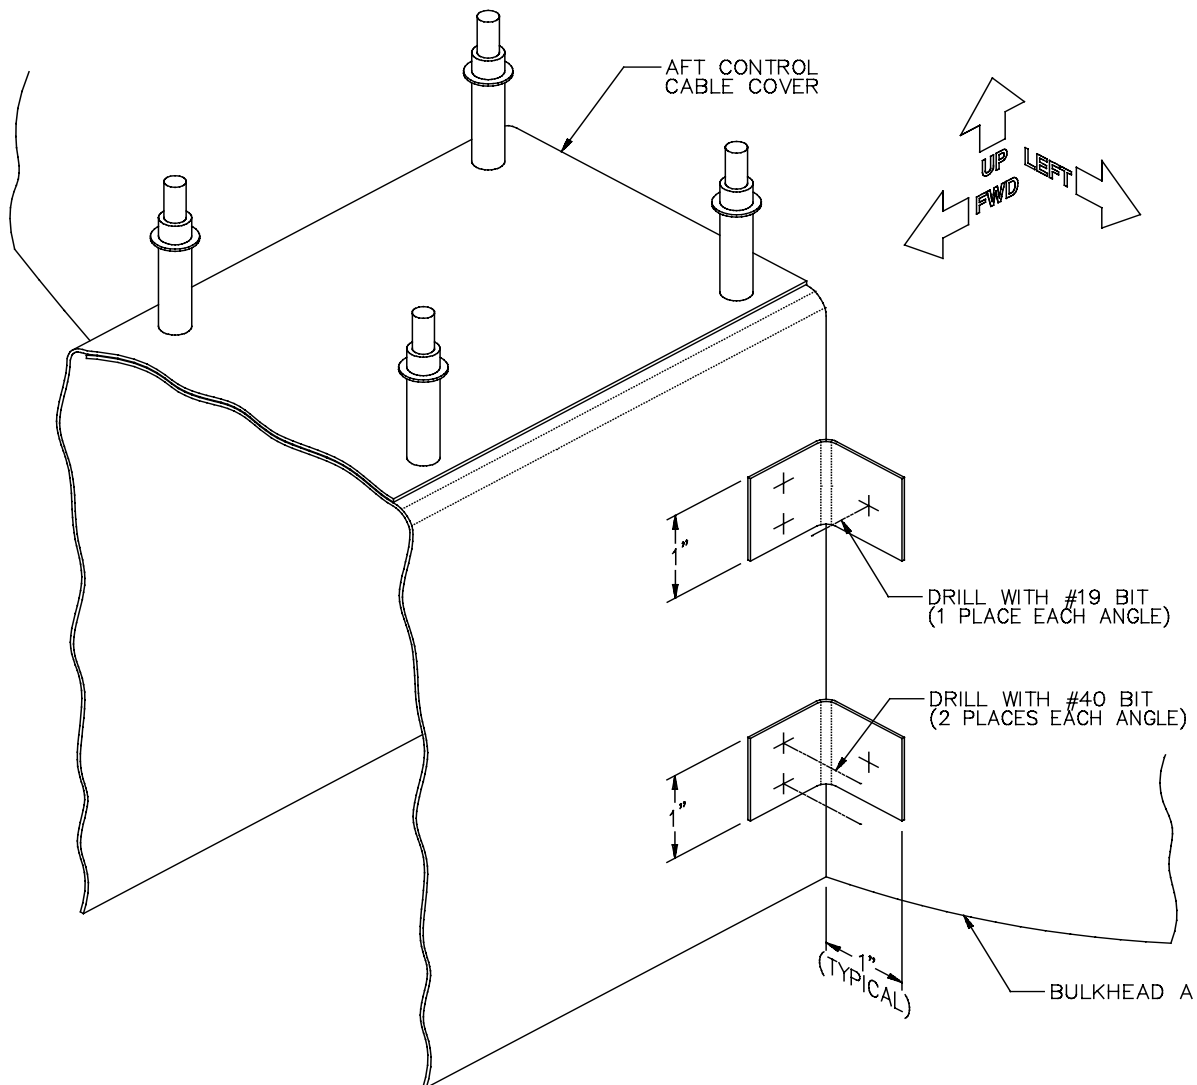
Positioning and Drilling the Aft Attach Angles for the Aft Control Cable Cover
